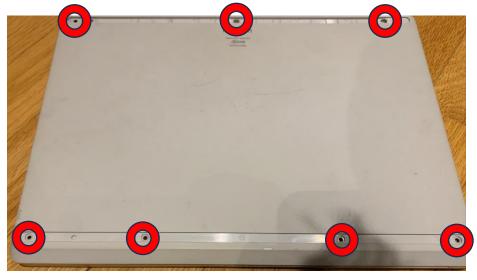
Surface Laptop Go bottom with screws outlined in red
